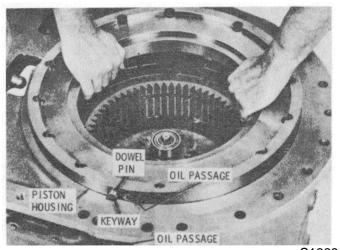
Installing First-and-Second Gear Clutch Piston Return Springs
